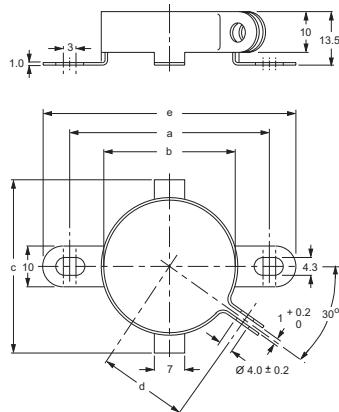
Dimensional outline of clamp for case ØD = 25, 30 and 40 mm.
